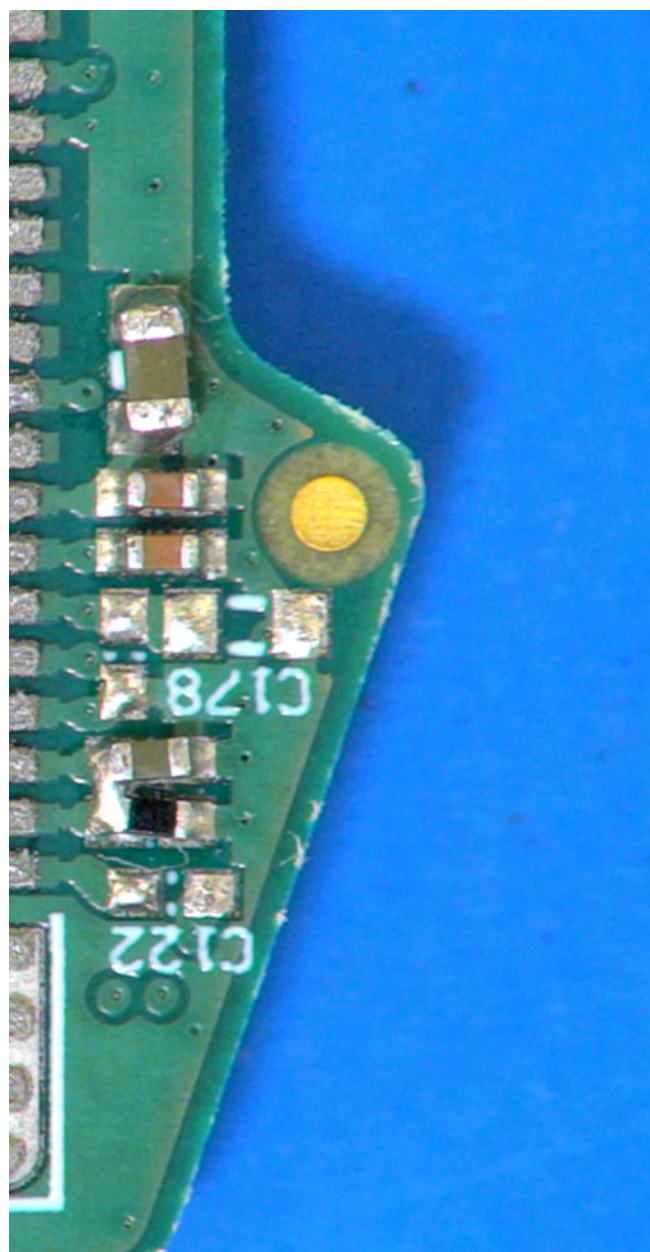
Skewed component due to proximity to the one being reworked and improper shielding.
